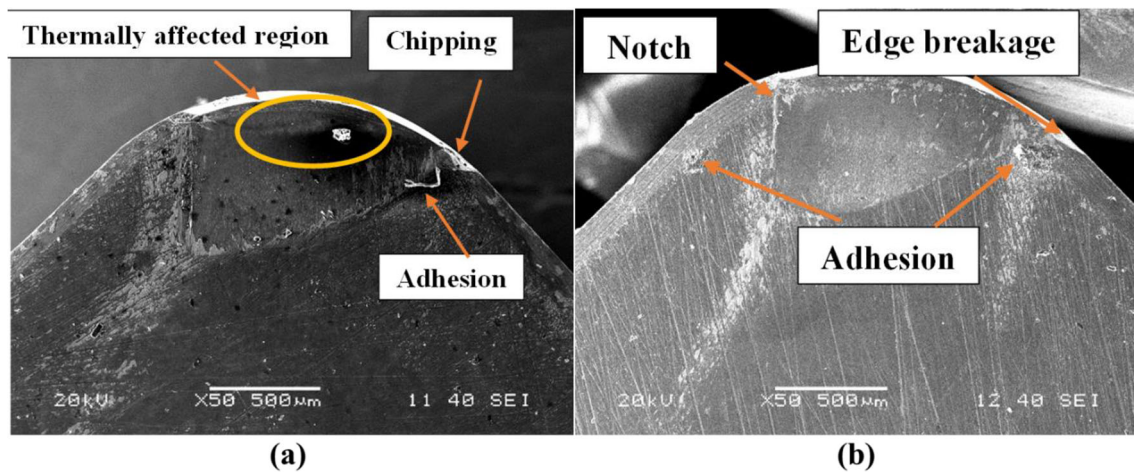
Crater wear at axial feed of 0.12 mm/rev and cutting speed of: (a) 111 m/min, (b) 87 m/min under dry cutting condition
